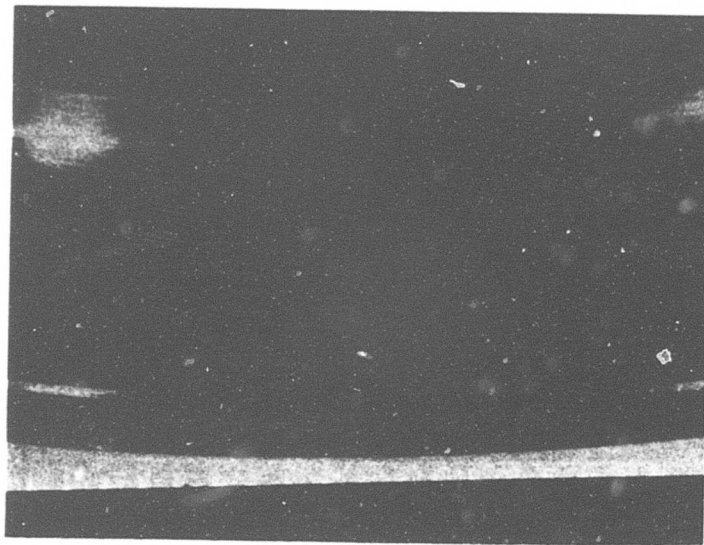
Condition of Outer Raceway and Balls of Bearing S/N 0006 After 500 Hour-Test
